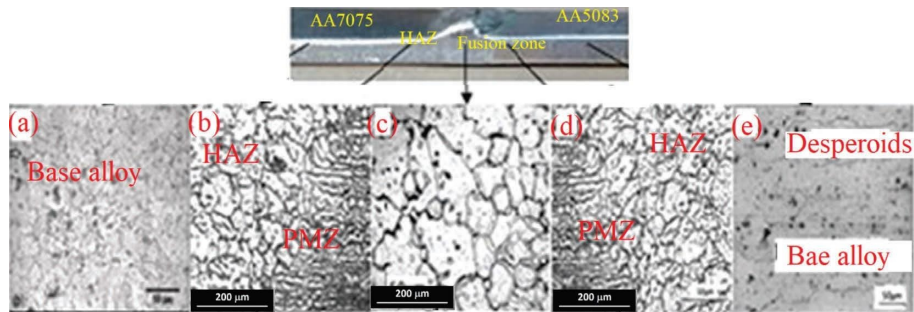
Macrosection of weld joint fabricated at 100 amp.
